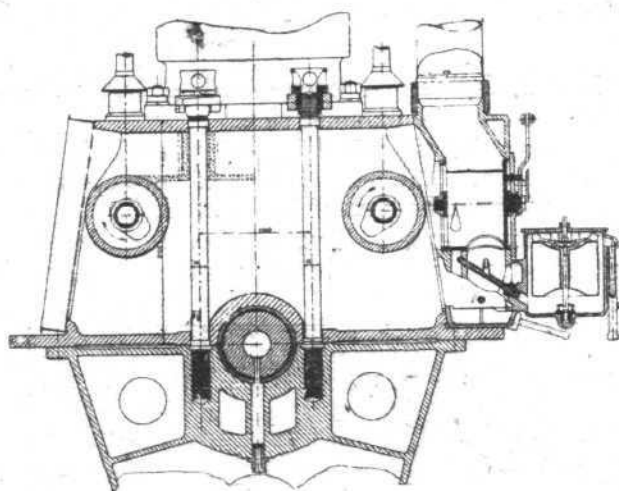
Arrangement of carburettor and section through air-intake passage in top half of crank chamber.
